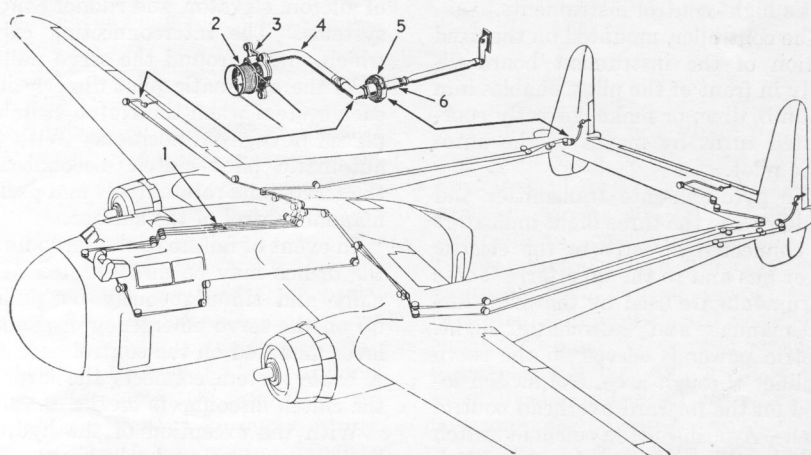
Tab control system: (1) tandem cable connections in the rudder system; (2) grooved cable drum; (3) gearbox; (4) flexible shaft; (5) tab screw-jack mechanism and mount; (6) irreversible screw jack.
